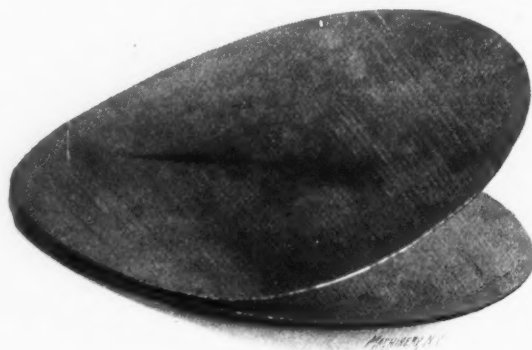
A Sample of the Fine Work of which the Machine is Capable.
